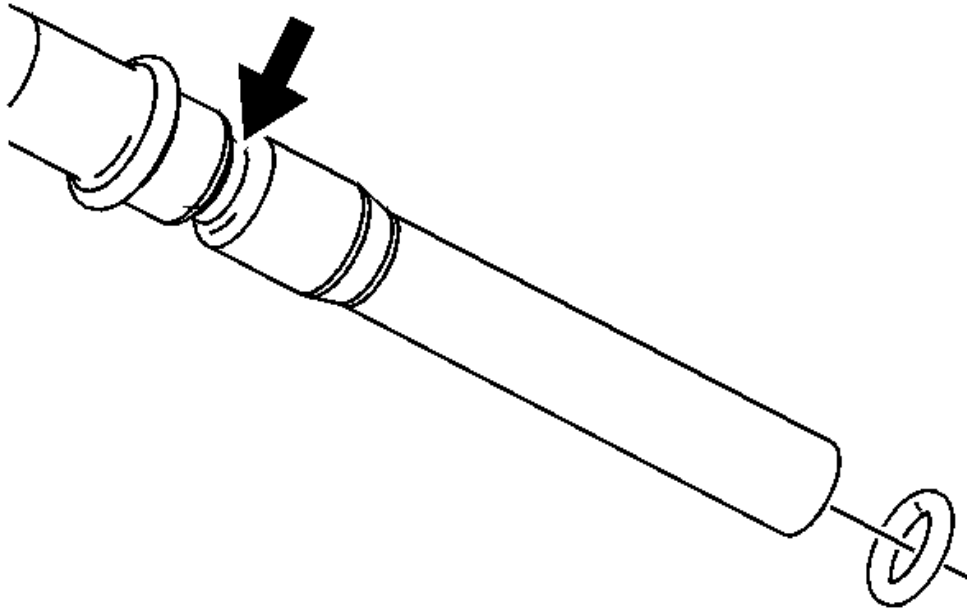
View Of Oil Level Indicator Tube O-Ring
